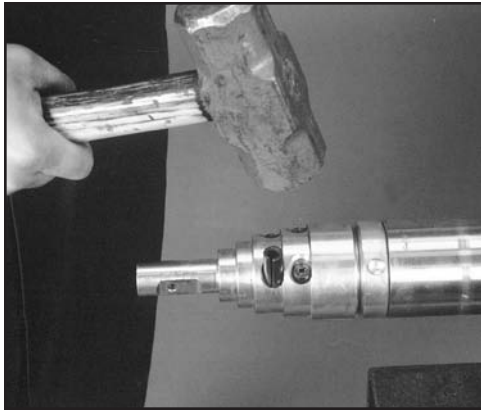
DRIVE IN THE OUTER ROLL PINS
